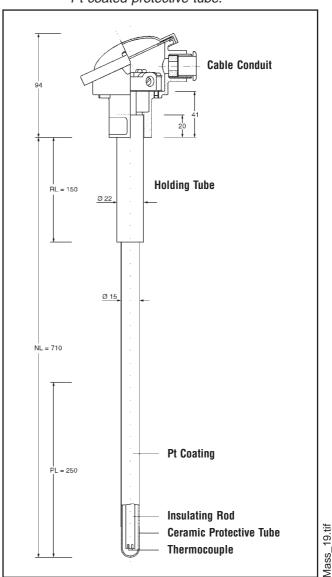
Dimensional drawing – thermocouple with Pt-coated protective tube.
